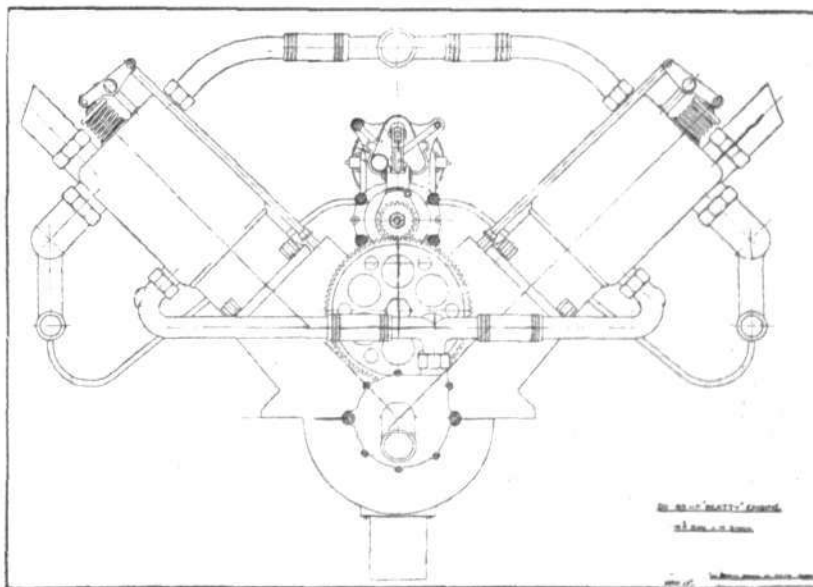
End elevation of the 80-90 h.p. vee Beatty engine.
